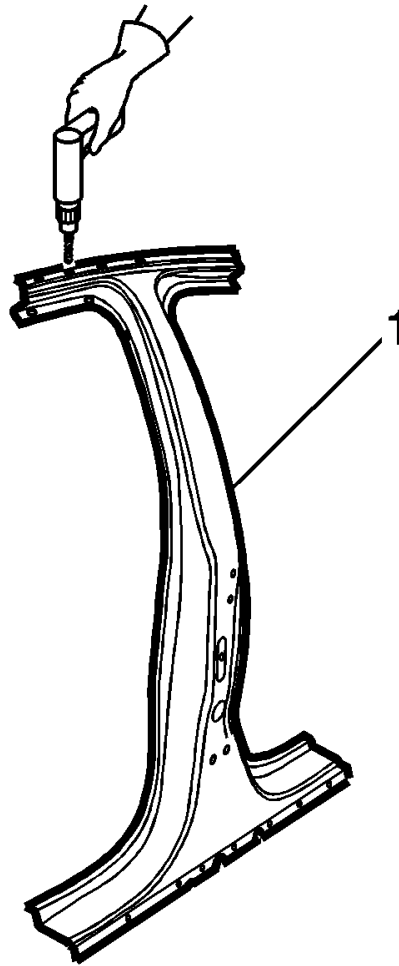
Drilling Plug Weld Holes In Service Part
